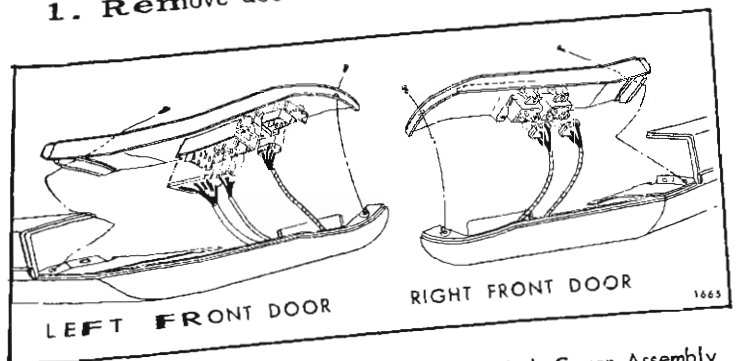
D14—Front Door Arm Rest Switch Cover Assembly
